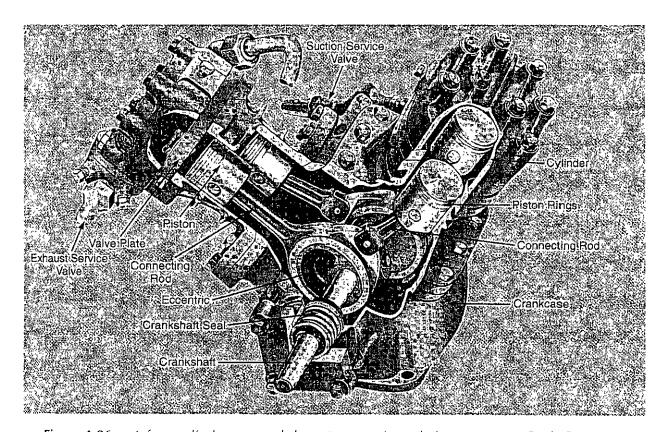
A four-cylinder, external-drive, V-type, air-cooled compressor. (Frick Co.)
